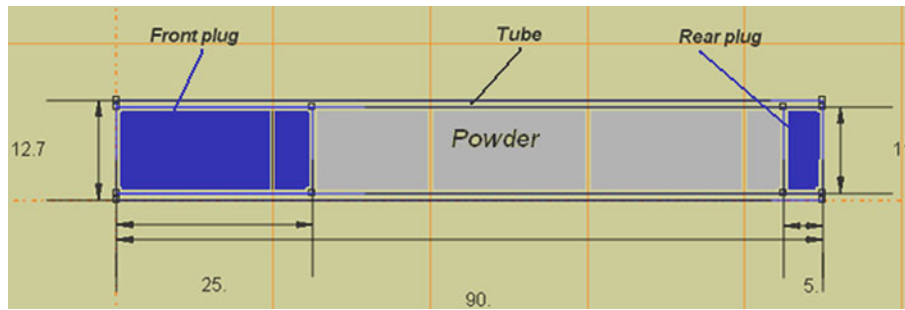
Geometry and dimensions (in mm) of the tubes used
